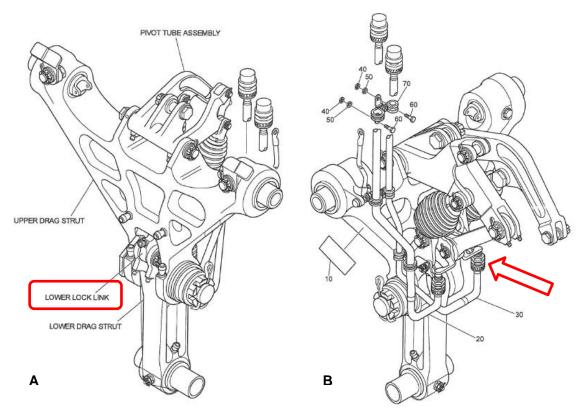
Drag Strut Assembly: A – font view (red frame shows the name of the component which was damaged during the accident); B – rear view(red frame shows the name of the component which was damaged during the accident). [source: CMM 32-21-03]
